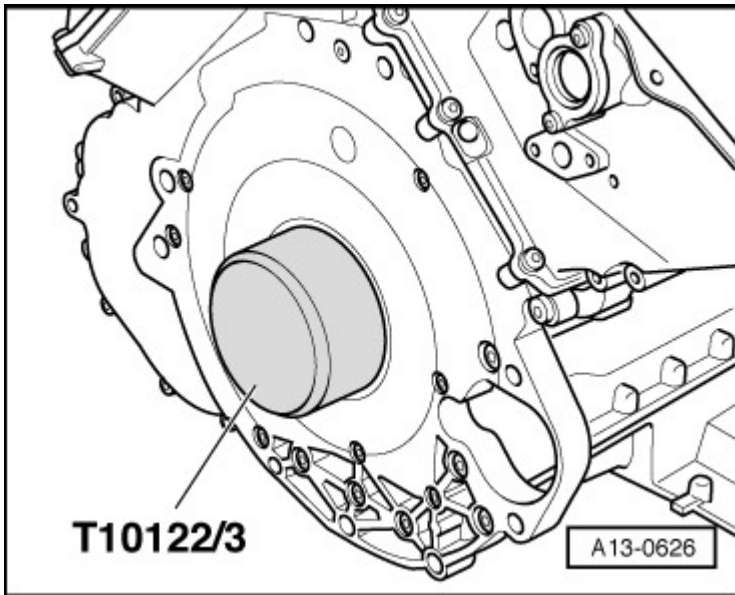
Pressing In Seal Evenly All Around Until It Reaches Stop Using T10122/3
